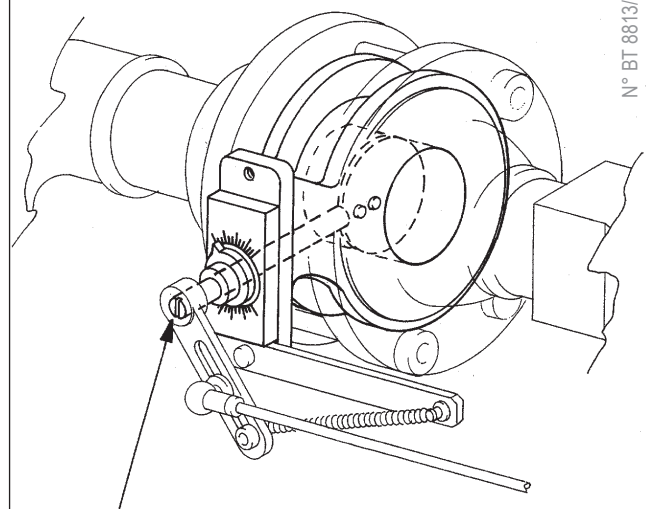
DETAIL OF GAS SUPPLY BUTTERFLY VALVE FOR COMIST 122 DSPGM
